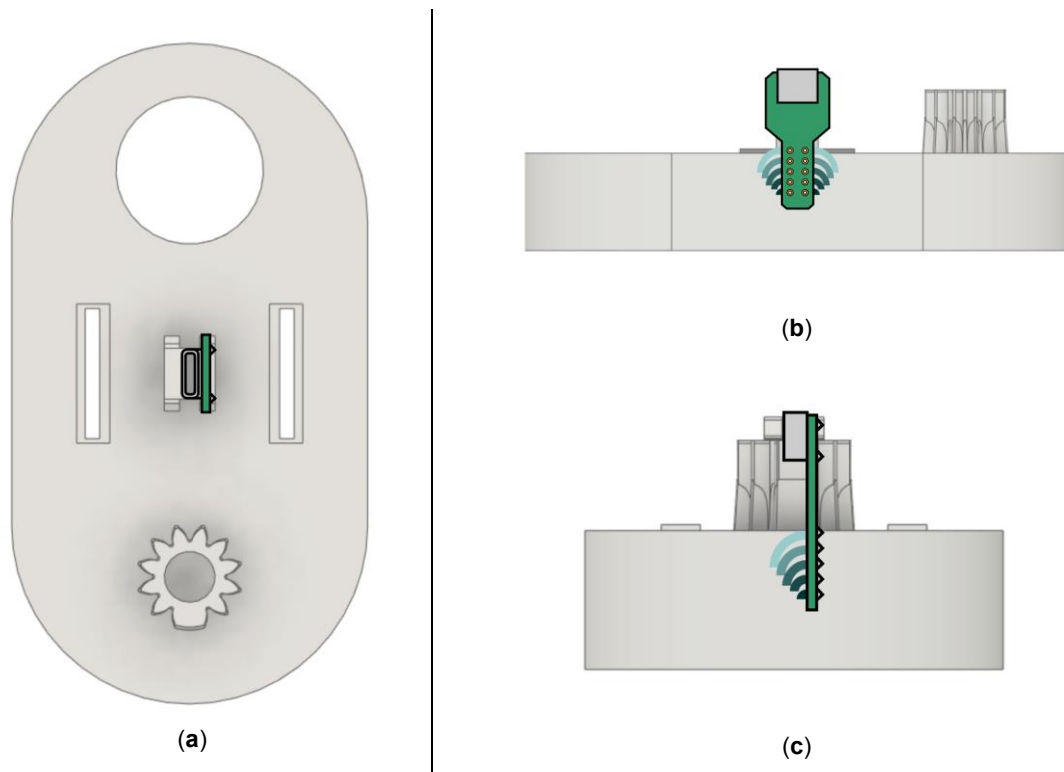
Illustration of the proposed custom-designed USB-C breakout board inside the latch hook of the resistance module: (a) top view; (b) side view; and (c) rear view.
